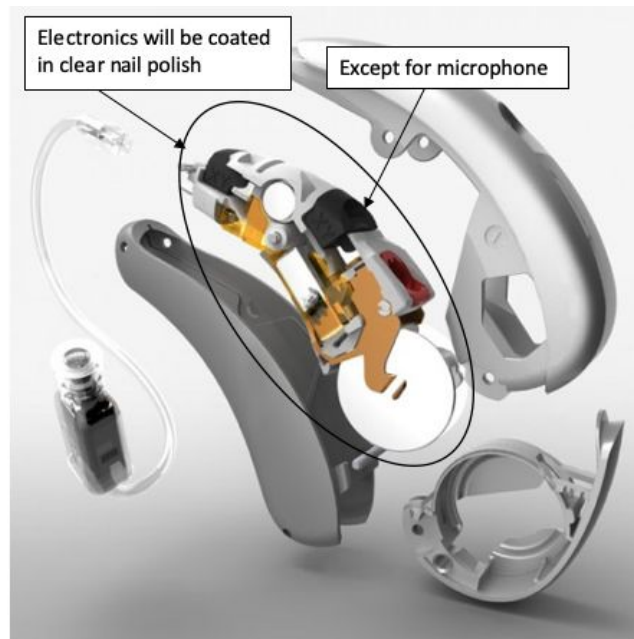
Exploded View of a Hearing Aid to show electronics inside
